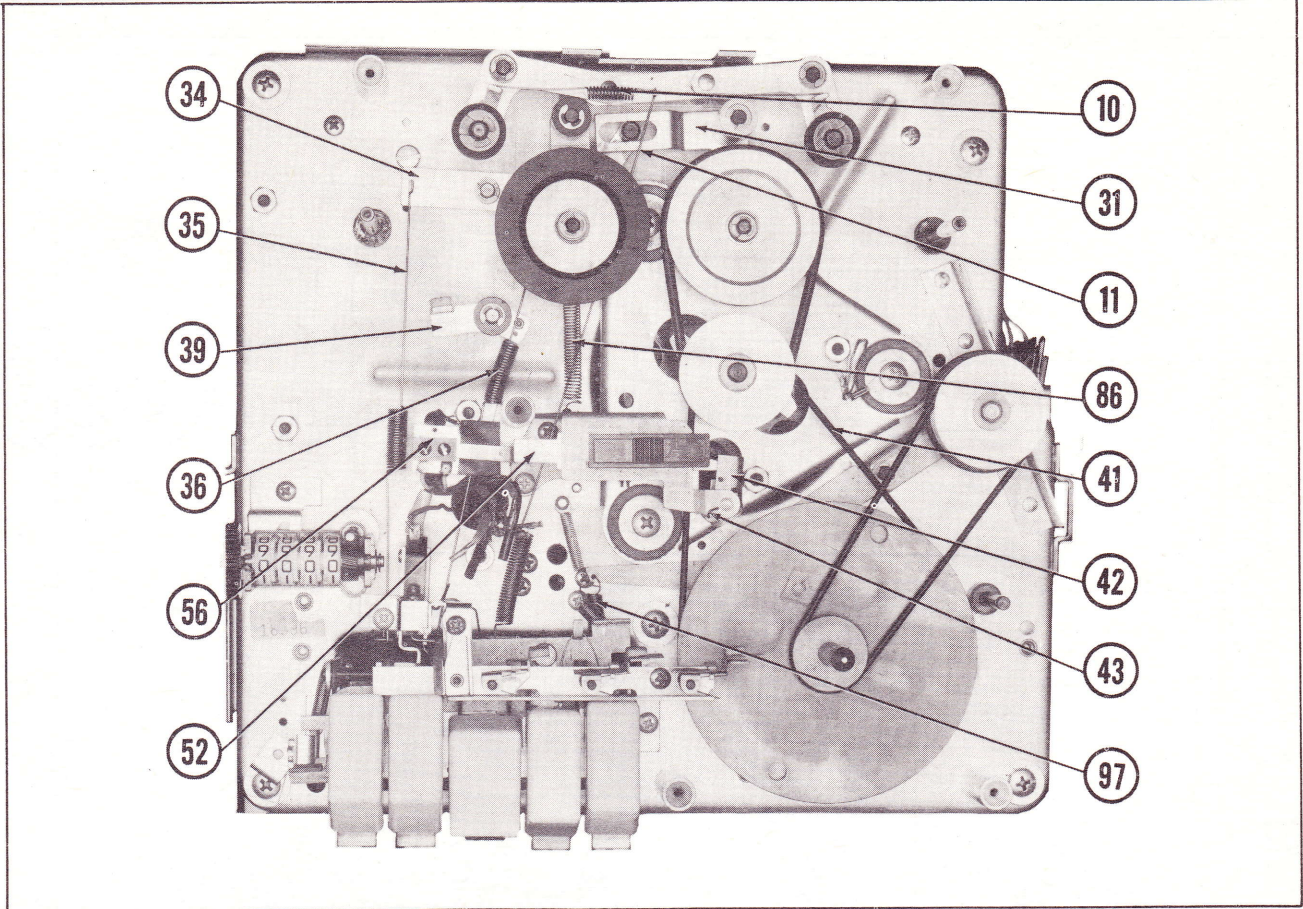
Top View Of Mechanism With Reel Rests And Head Plate Assembly Removed.
